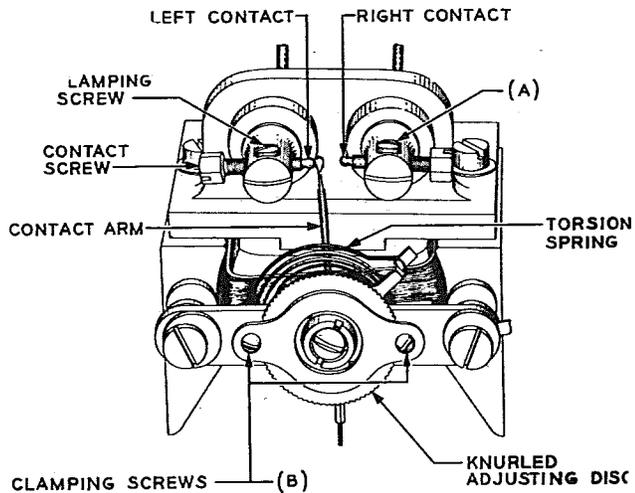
CONTACT ASSEMBLY - WESTON TYPE RELAYS
